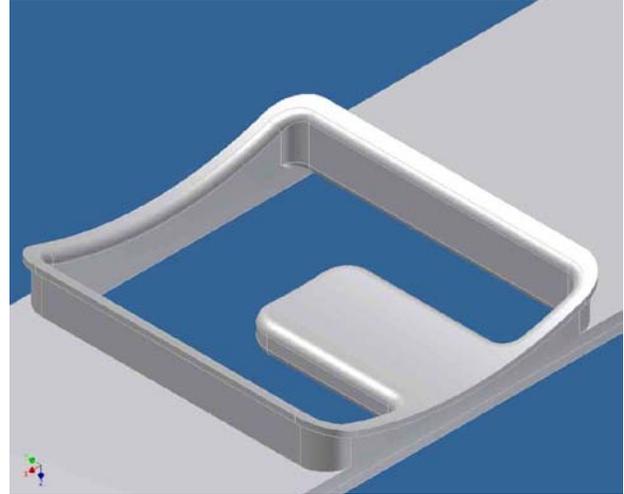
Coupler tongue inside coupler box at the top end of the waveguide assembly which opens into the beam tube.
